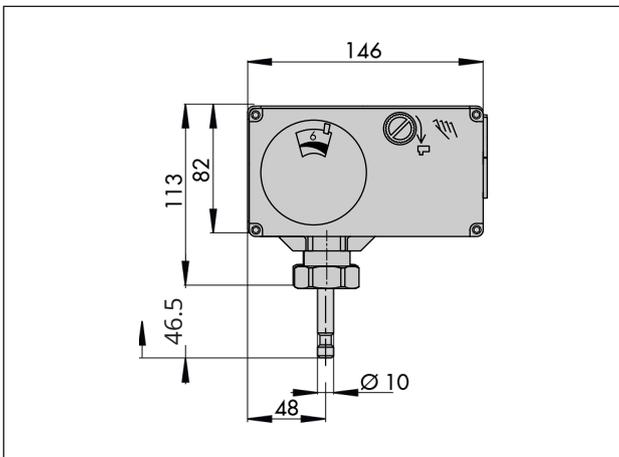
Dimensions in mm · TROVIS 5724-330, TROVIS 5725-330
